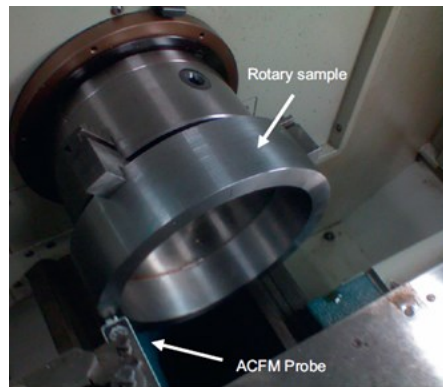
Experimental setup for the turning lathe tests using the rotary test piece [54].
